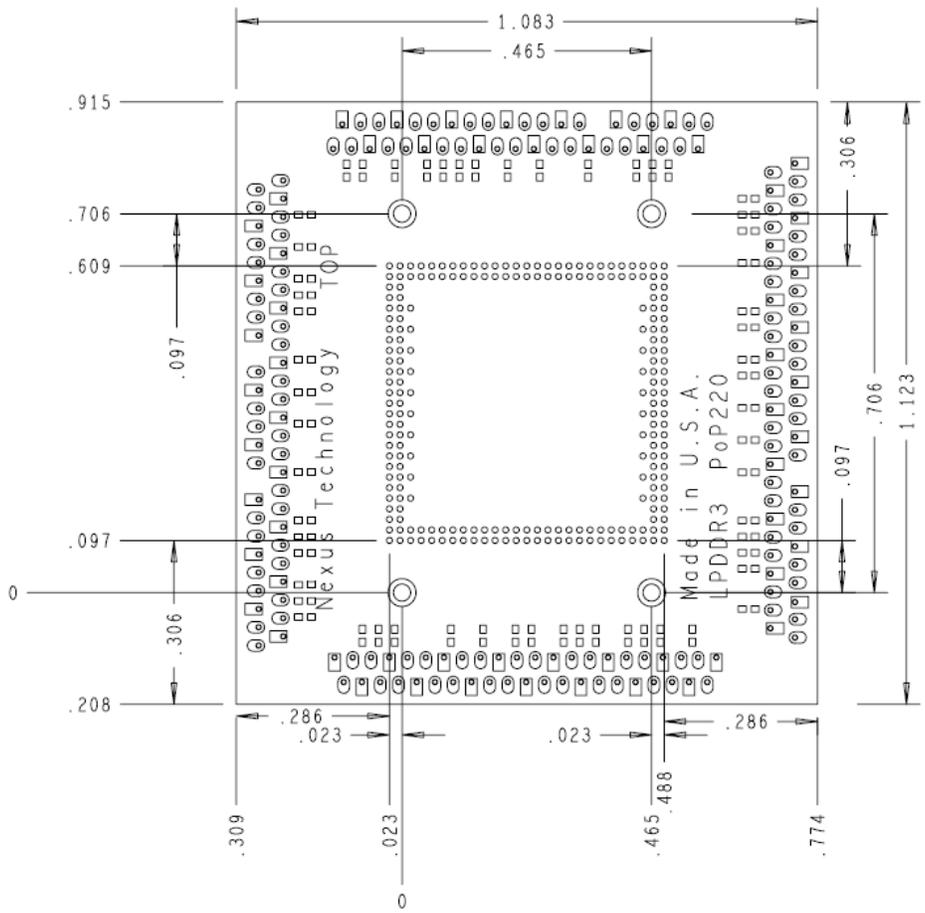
LPDDR2/LPDDR3 220-Ball PoP Oscilloscope Component Interposer Dimensions
